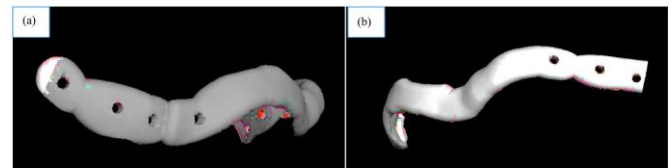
3D CAD model of supporting guide (a) front view, and (b) top view.
